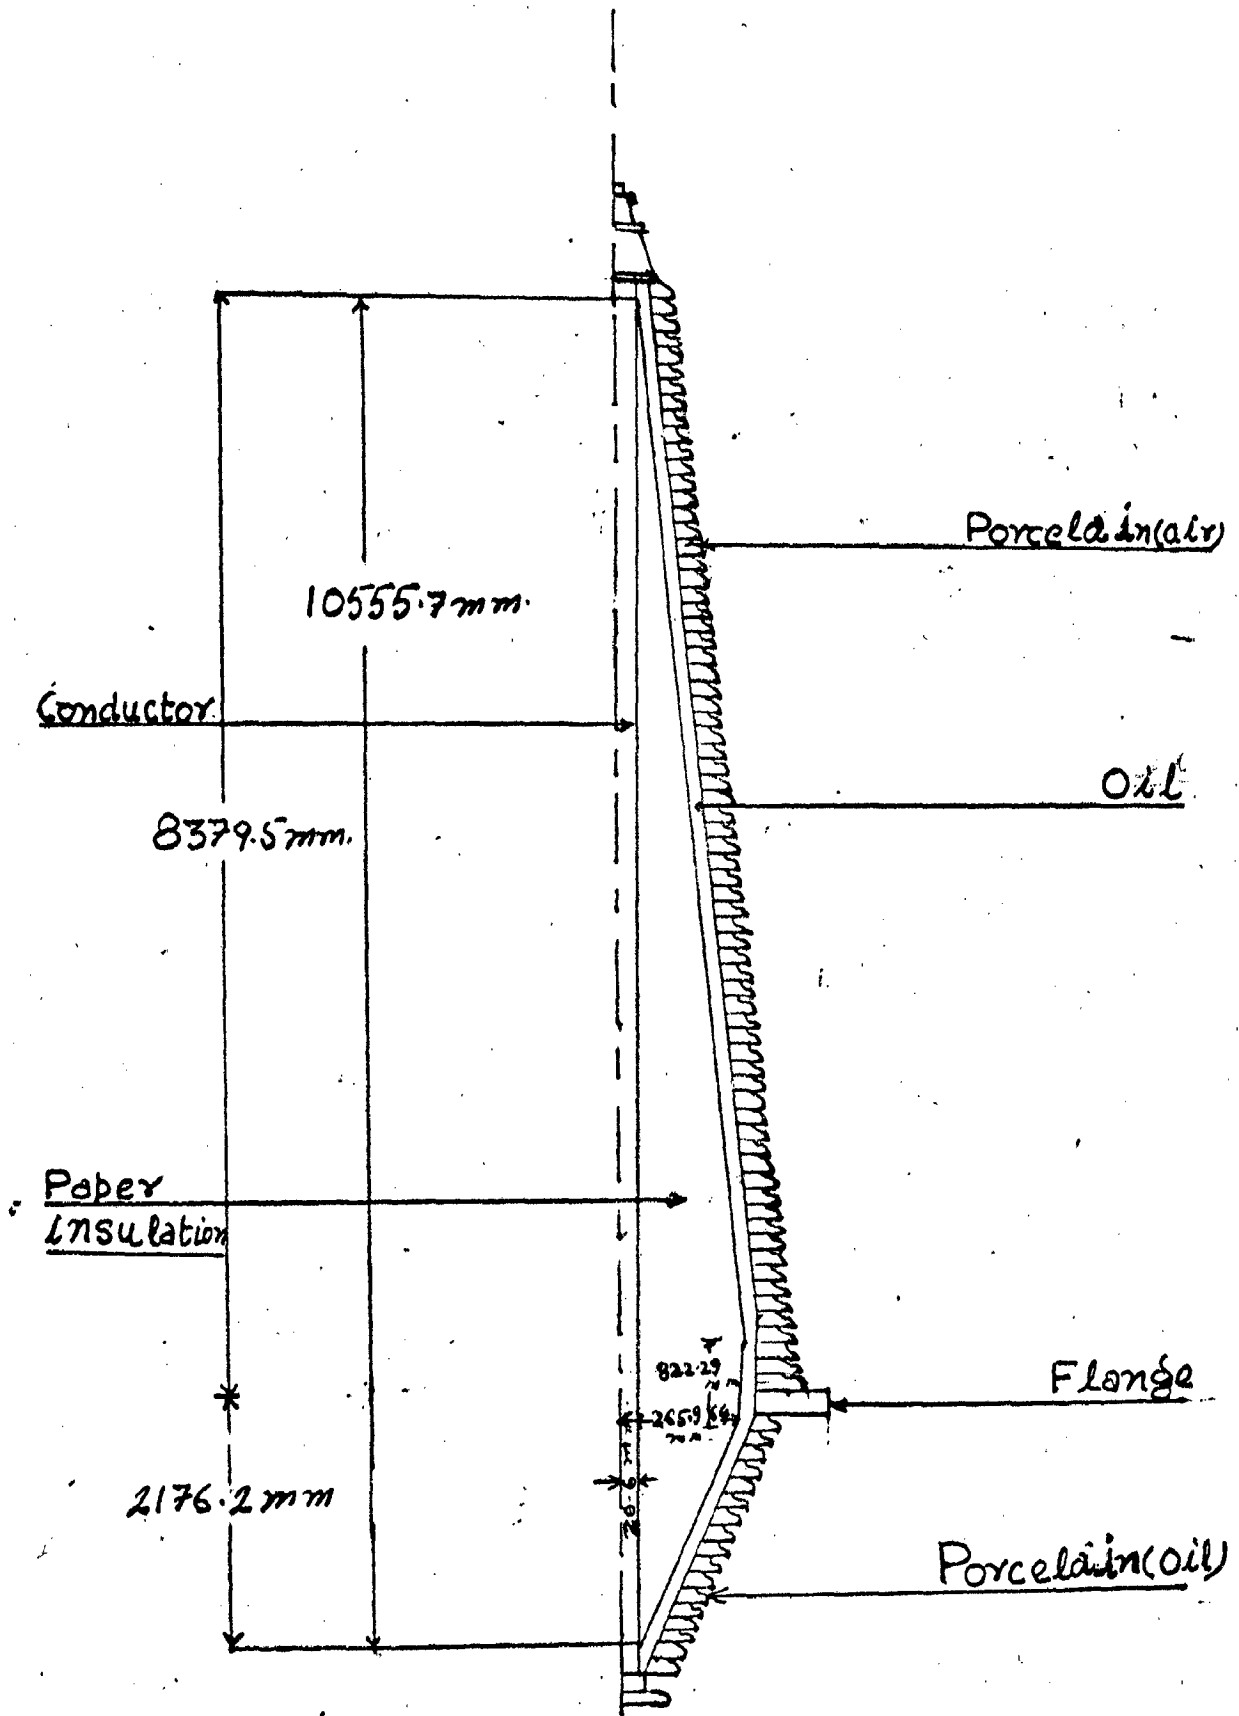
Main Dimensions of 750kV, 2000A, OIP, outdoor-immersed bushing
